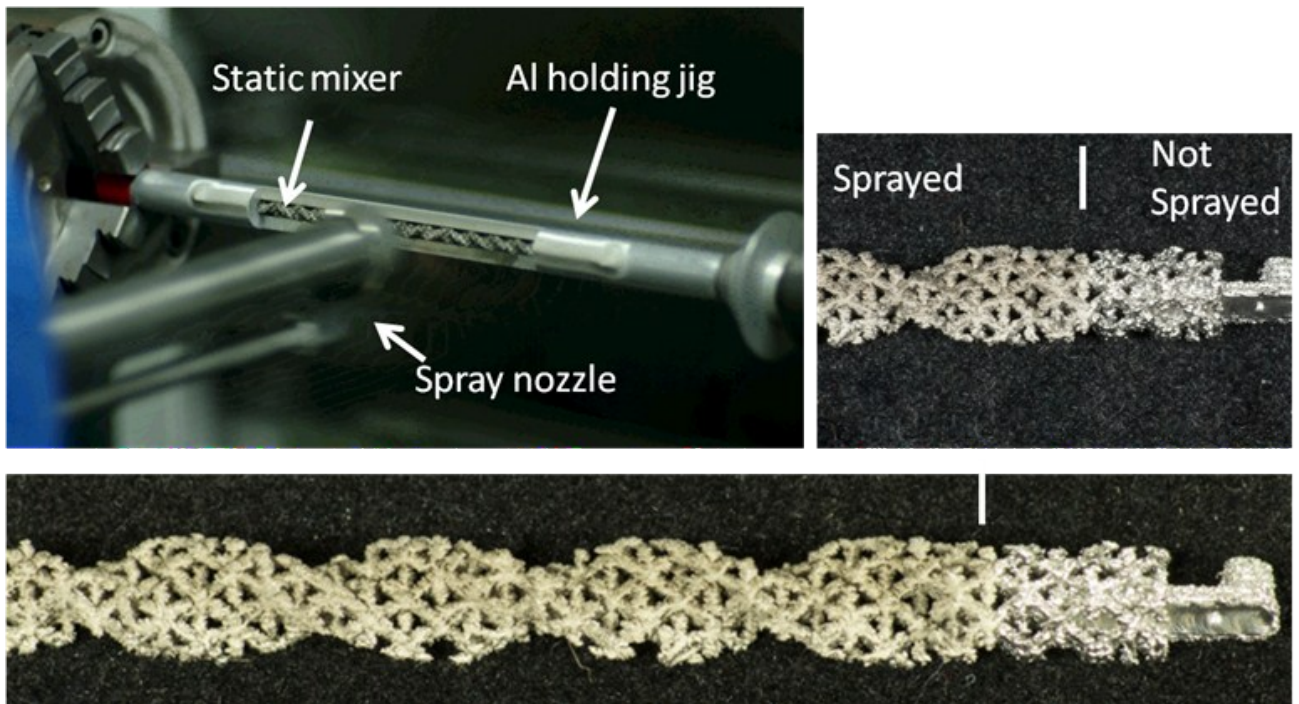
Cold spray method for coating nickel onto a 3D printed metal scaffold.
